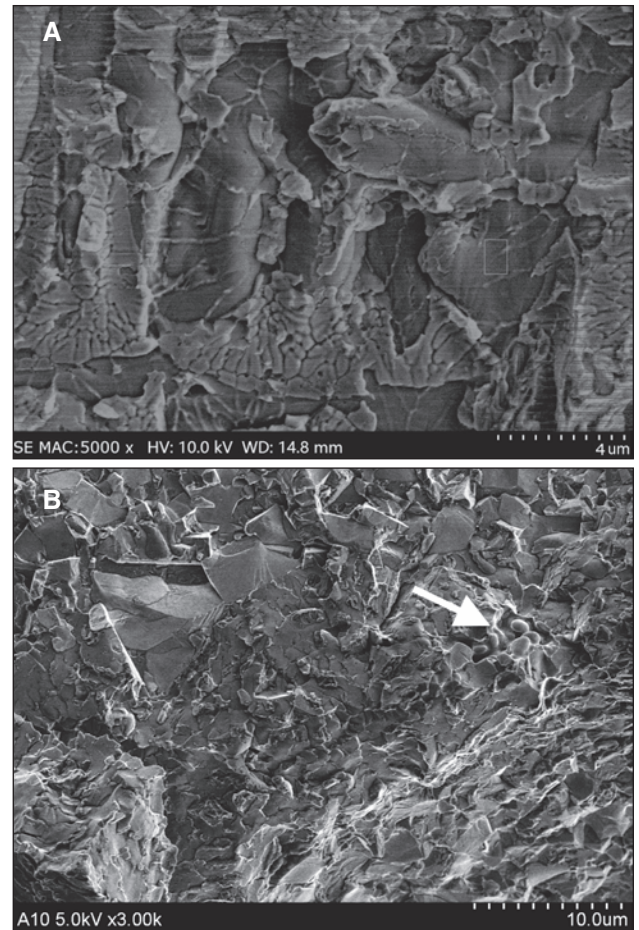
Typical bend fracture surface. A — Interdendritic separation in the weld fusion zone; B — transgranular separation in the HAZ.
